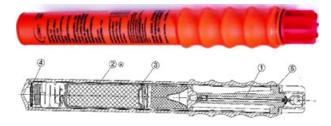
Comet® rocket—image (top), and schematic drawing (bottom). Legend to the schematic drawing: 1, ignition components; 2, rocket; 3, outer shell; 4, plate; 5, stickler.
